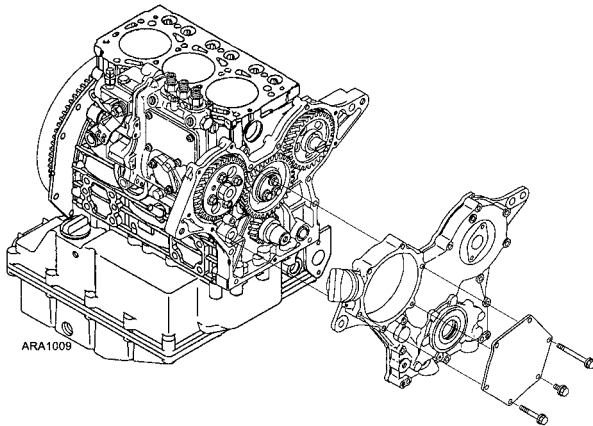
Remove Injection Pump Timing Cover and Gear Case Cover
